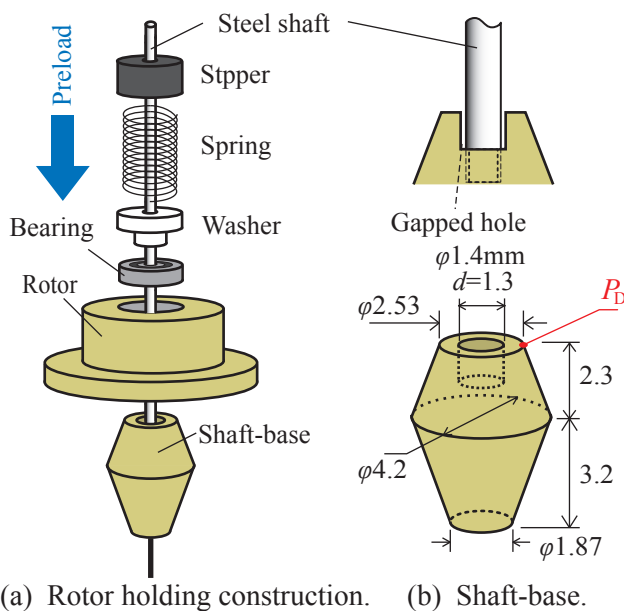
Rotor holding construction using a shaft-base with gapped hole and a preload mechanism.
